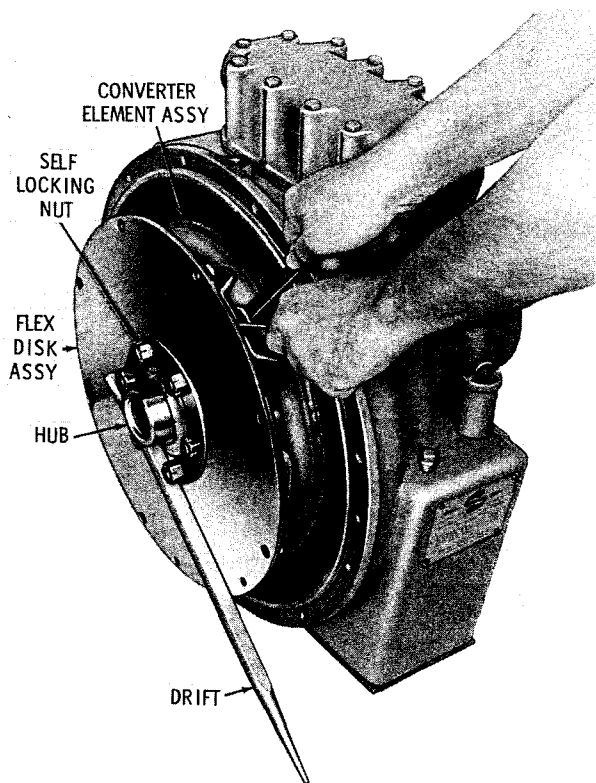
Installing flex disk outer bolts, nuts (TC 250)
